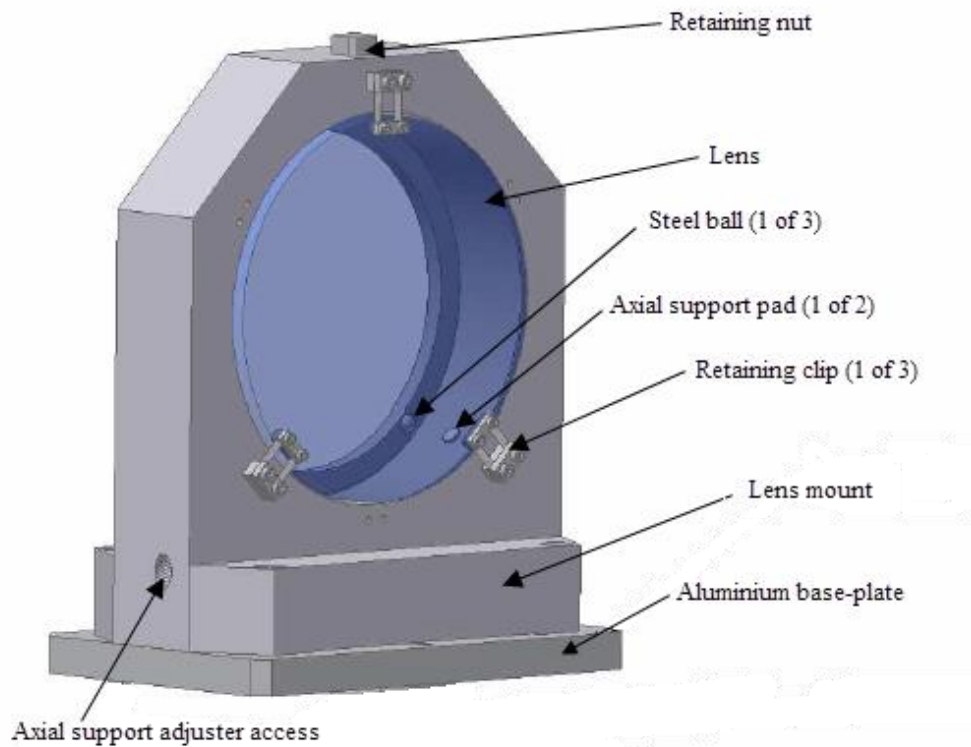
FLC lens mount with lens and aluminium base-plate fitted. The lens is retained against three steel balls (set into the base of the recess) by three spring loaded retaining clips fitted to the face of the mount. The lens is supported axially by two adjustable pads and retained against them by a spring loaded nut on top of the mount. The aluminium plate is an interface between the lens mount and the three mounting legs which screw into it. The mounting legs are clamped to the Nasmyth table when the lens has been positioned but allow some flexibility to account for thermal expansion between the assembly and the steel optical table.
